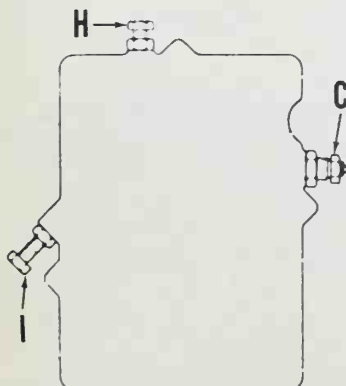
Drawing showing location of low idle speed screw (I), high idle speed screw (H) and torque control screw (C).
